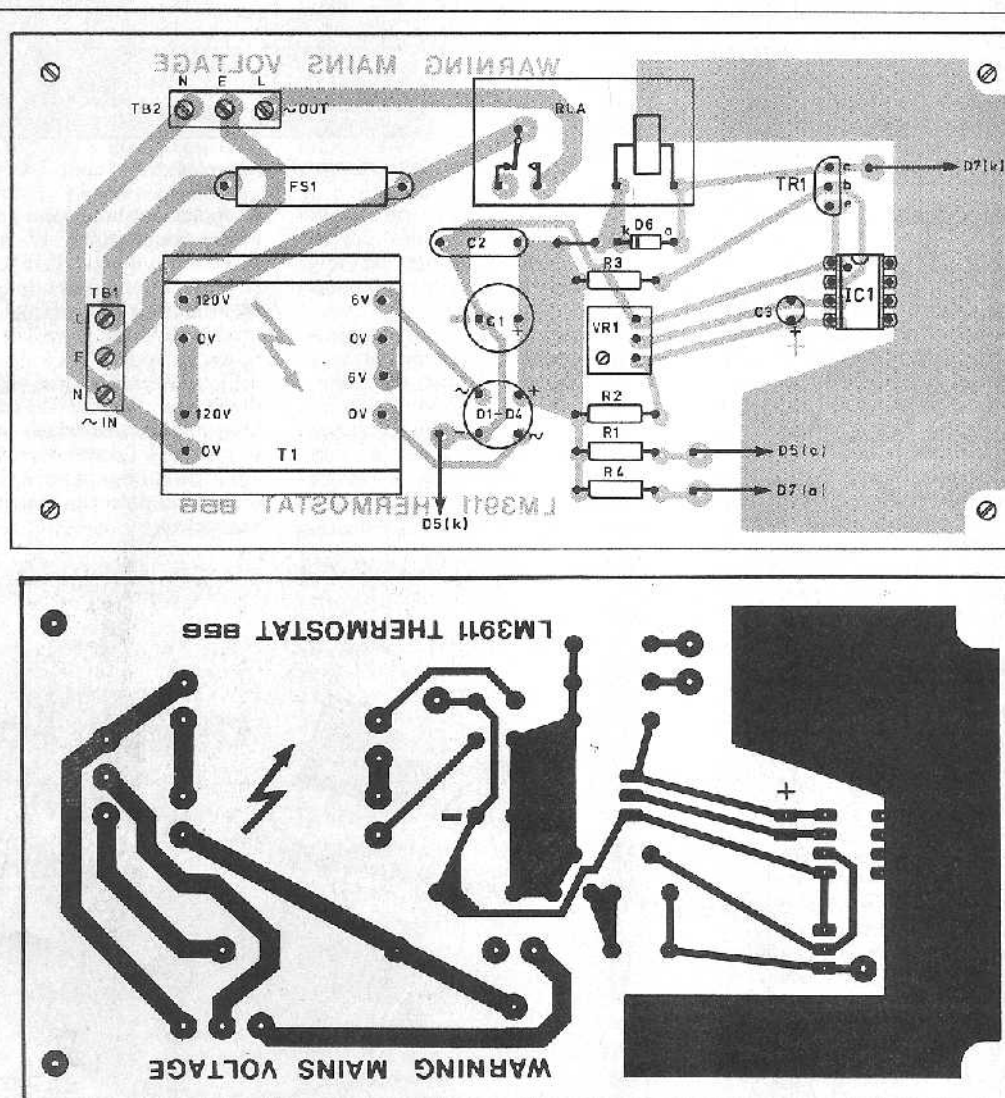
Printed circuit board component layout and underside copper foil master pattern (full size). Note the large area of copper which act as a heatsink (cold) for the i.c.
